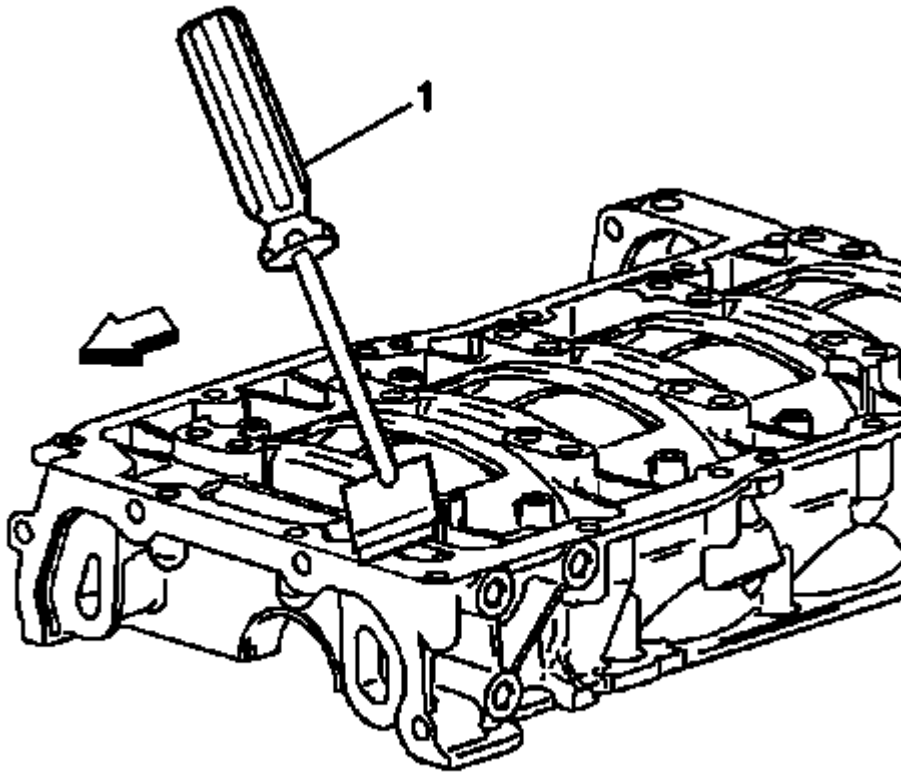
Clean Sealing Material From Gasket Mating Surfaces On Lower Crankcase Oil Pan Side With Suitable Tool
